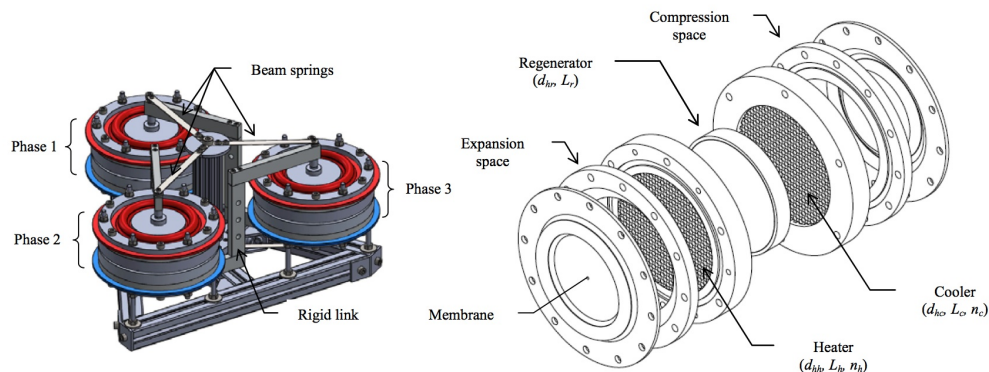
Design and exploded Stirling machine under analysis [13].
